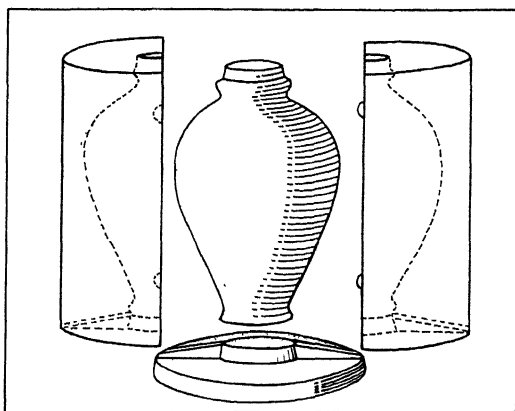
The fourth-type mold separated. In this case is shown a practical type of joggle to hold the bottom in place. Remember that a joggle must be so constructed that the sections can be drawn away freely in casting. A section should be drawn straight out and not upward.
